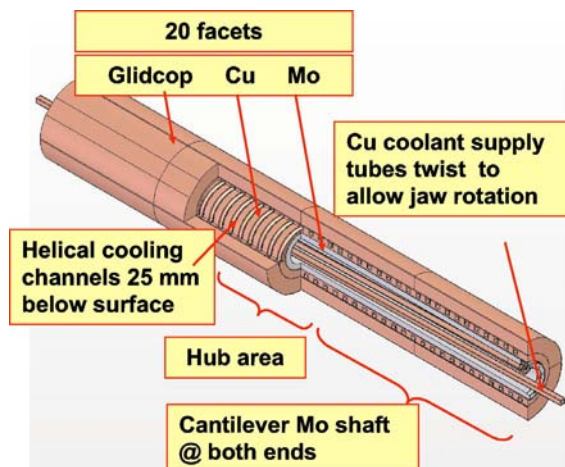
Cutaway of Jaw showing outer jaw surfaces and cooling tube routed through the center of the molybdenum shaft.
